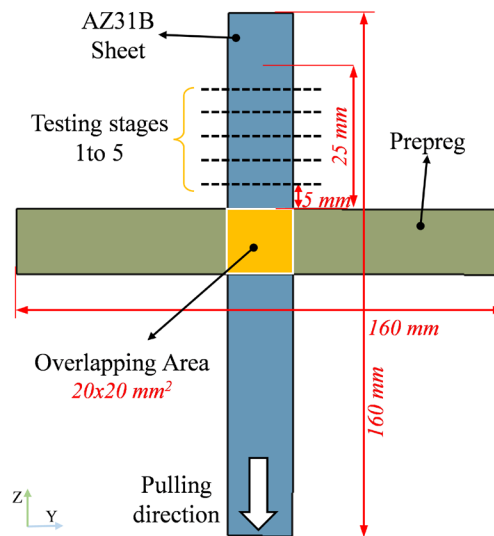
Sketch and dimensions of the specimen used in the stop-start pull-through tests.
